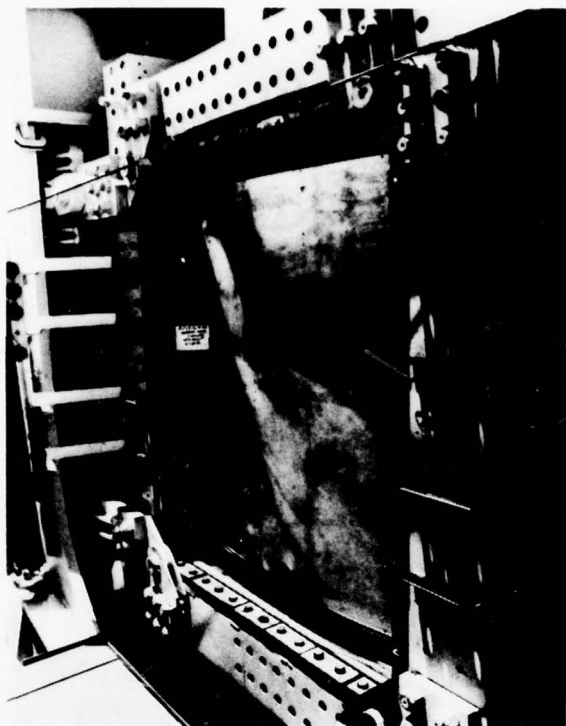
TEST FAILURES, RIVET PANEL - FRONT VIEW
